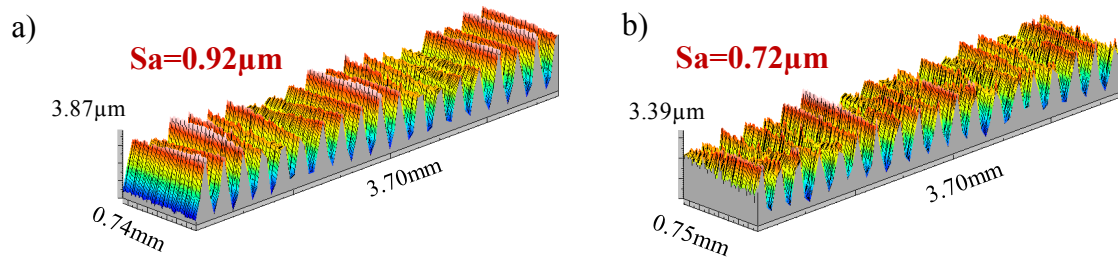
Workpiece surface topography in Test 3 following turning with (a) new and (b) worn inserts
